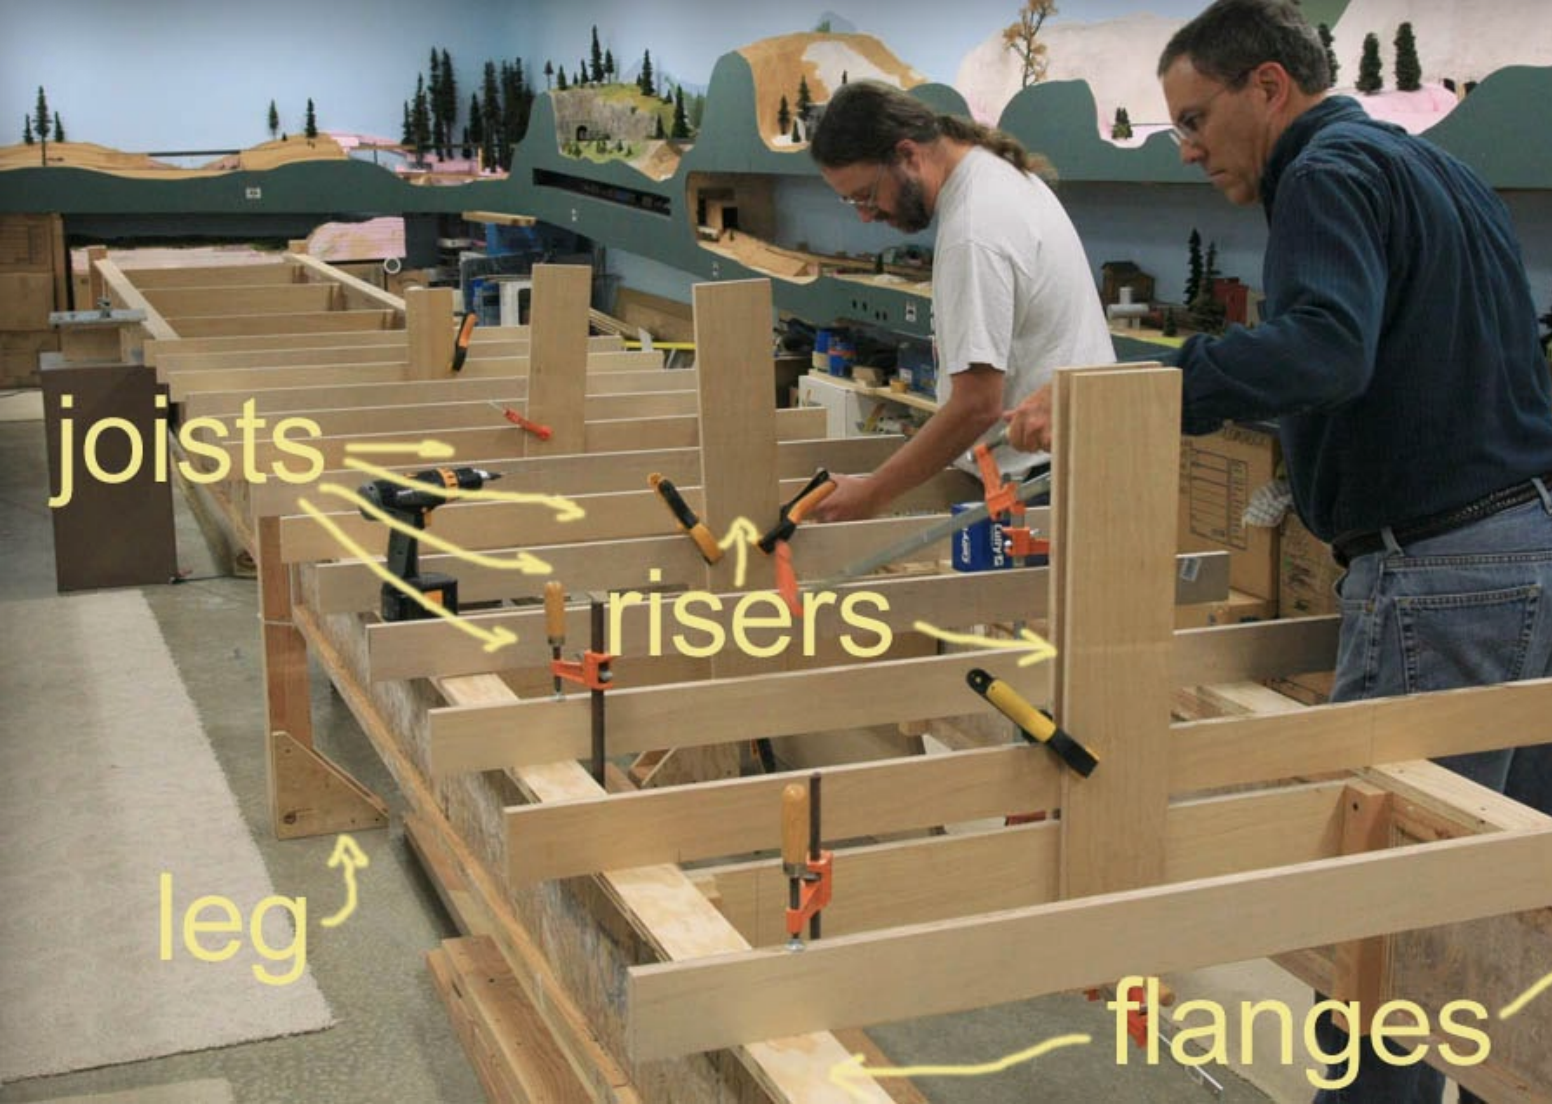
Adding flanges, joists and risers to the peninsula.
